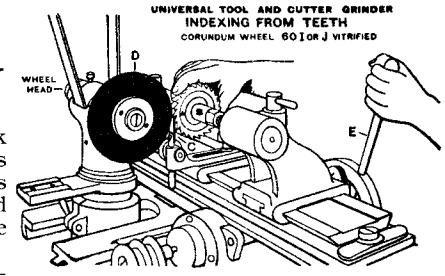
GRINDING PLAIN MILLING CUTTER.
